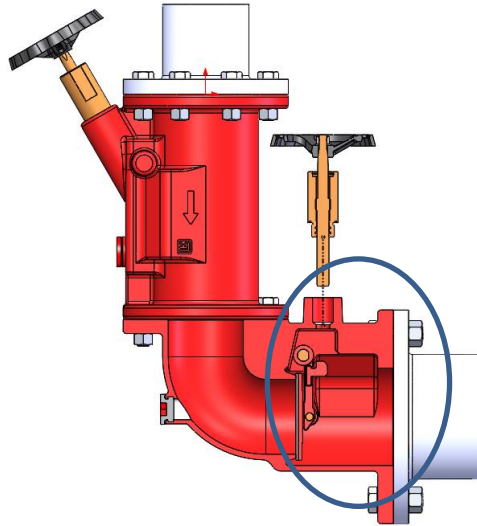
Bottom part of angled storm valve with removed stem sleeve, G7/8" thread.
